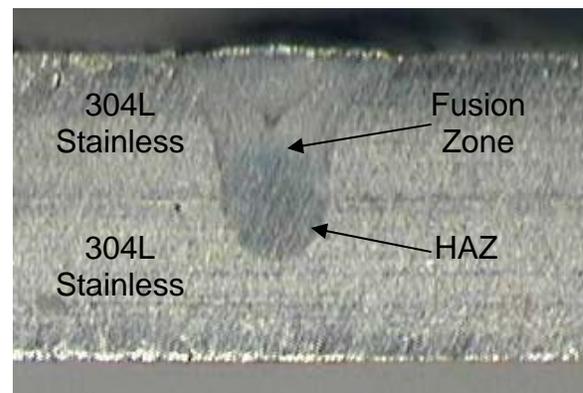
Fusion bond created by a pulsed Nd-YAG laser welding technology.
